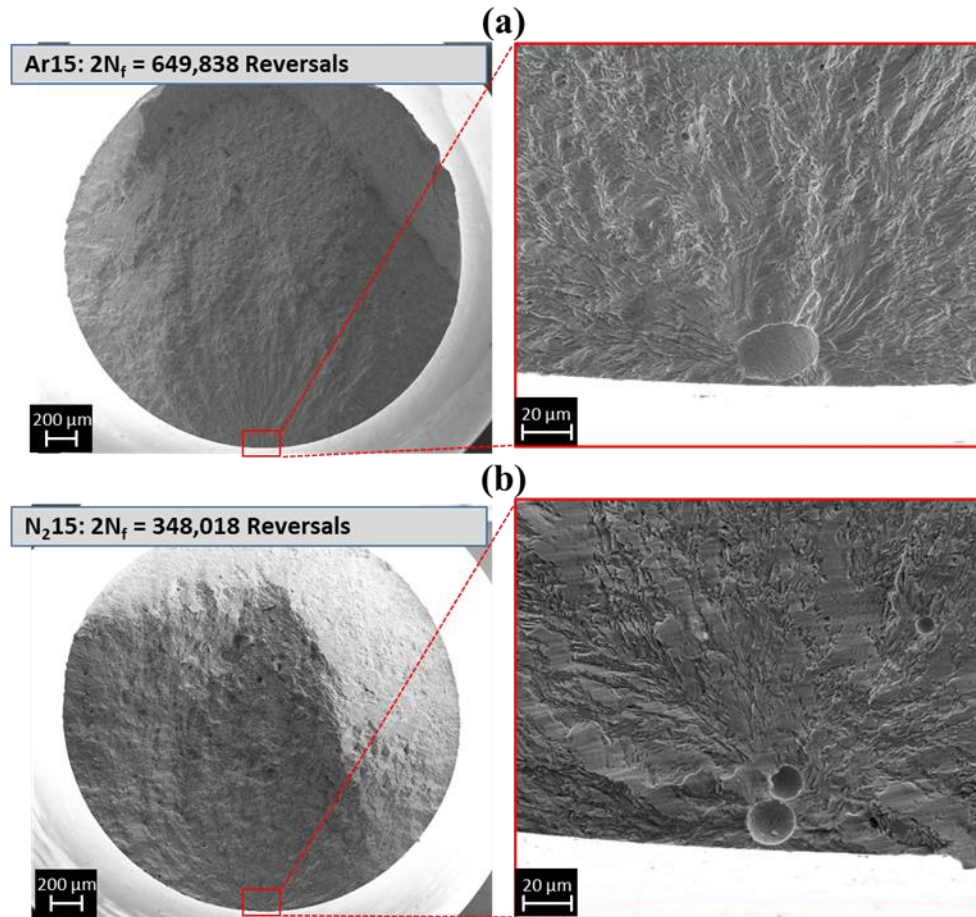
Fracture surfaces of L-PBF 17-4 PH SS specimens with hourglass geometry tested at 600 MPa: (a) specimen "Ar15" with 649,838 reversals to failure and (b) specimen "N₂15" with 348,018 reversals to failure.
